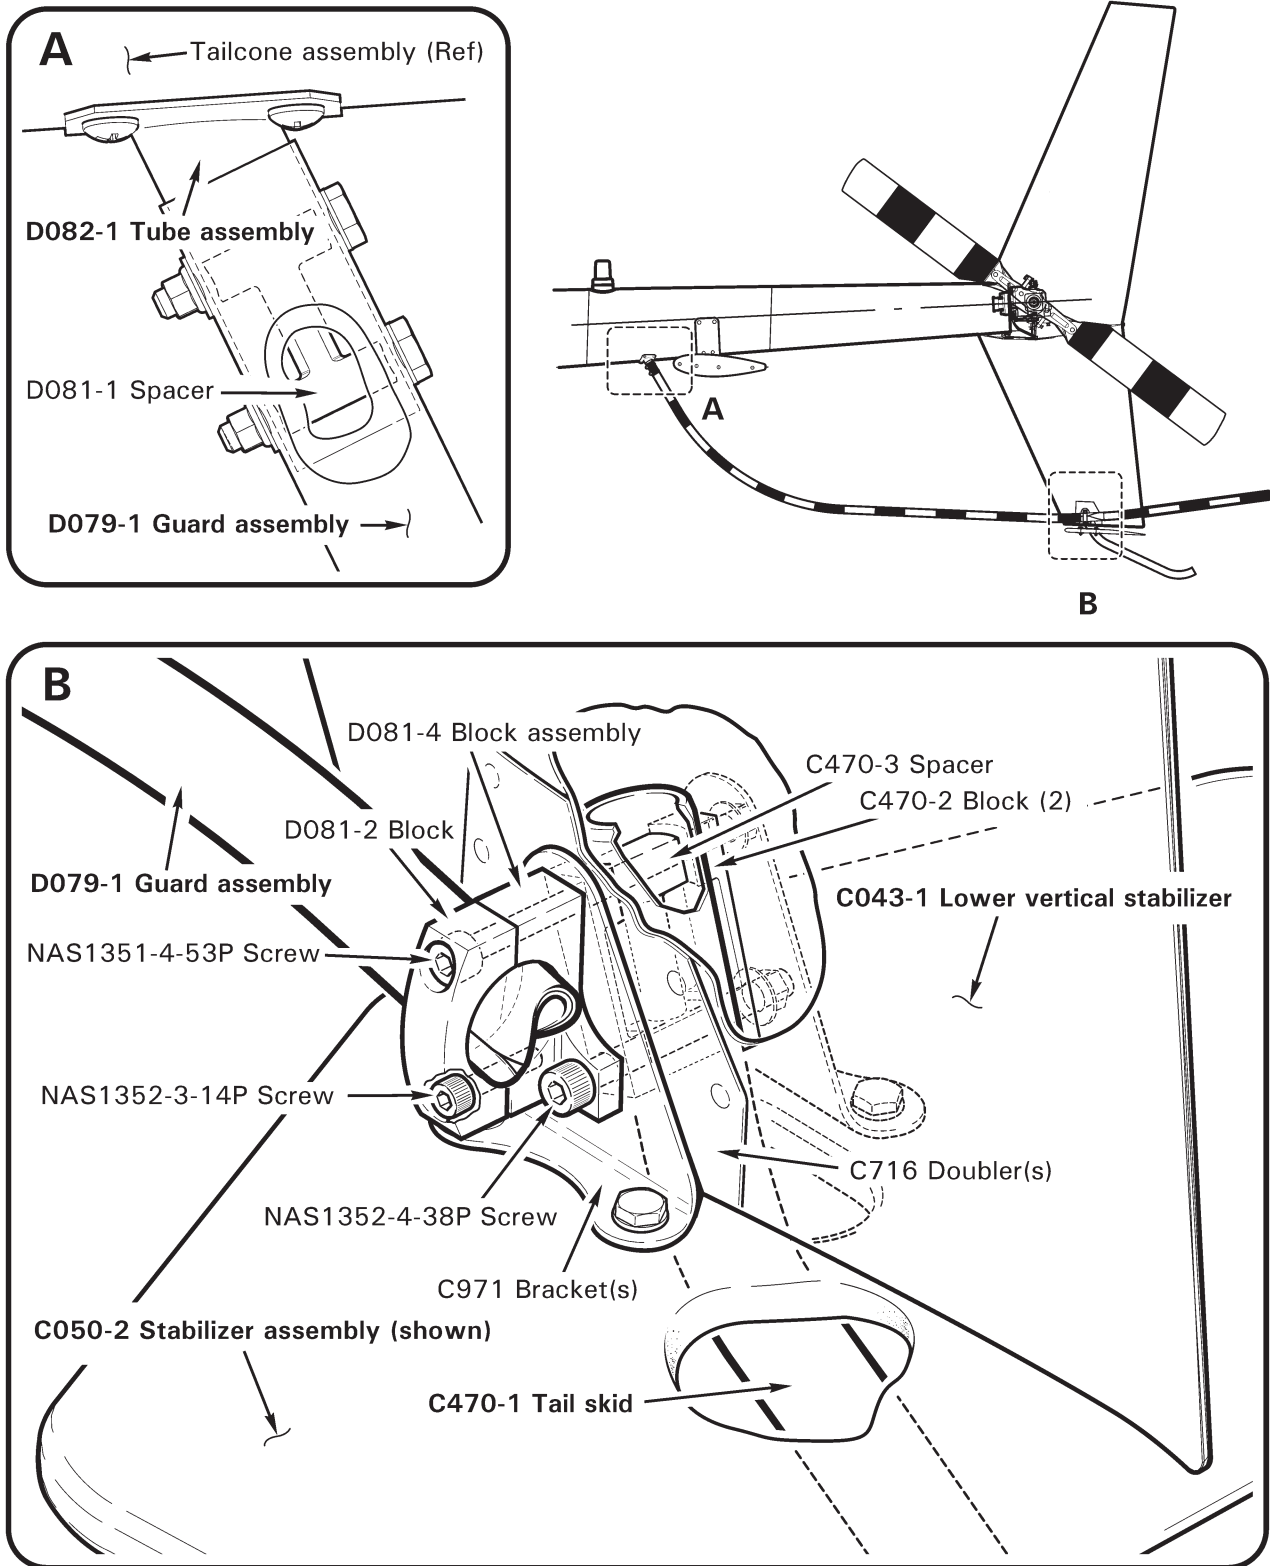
EMPENNAGE – TAIL ROTOR GUARD
